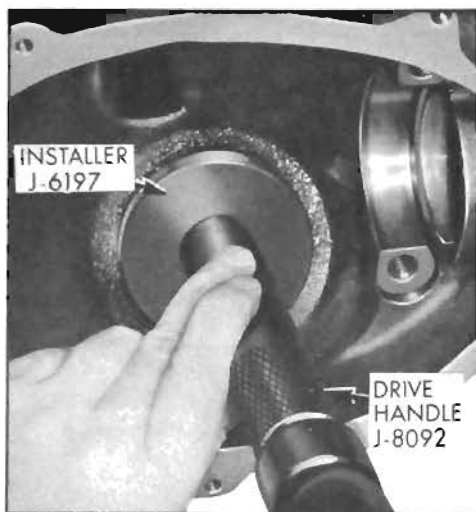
Installing Rear Pinion Bearing Outer Race
